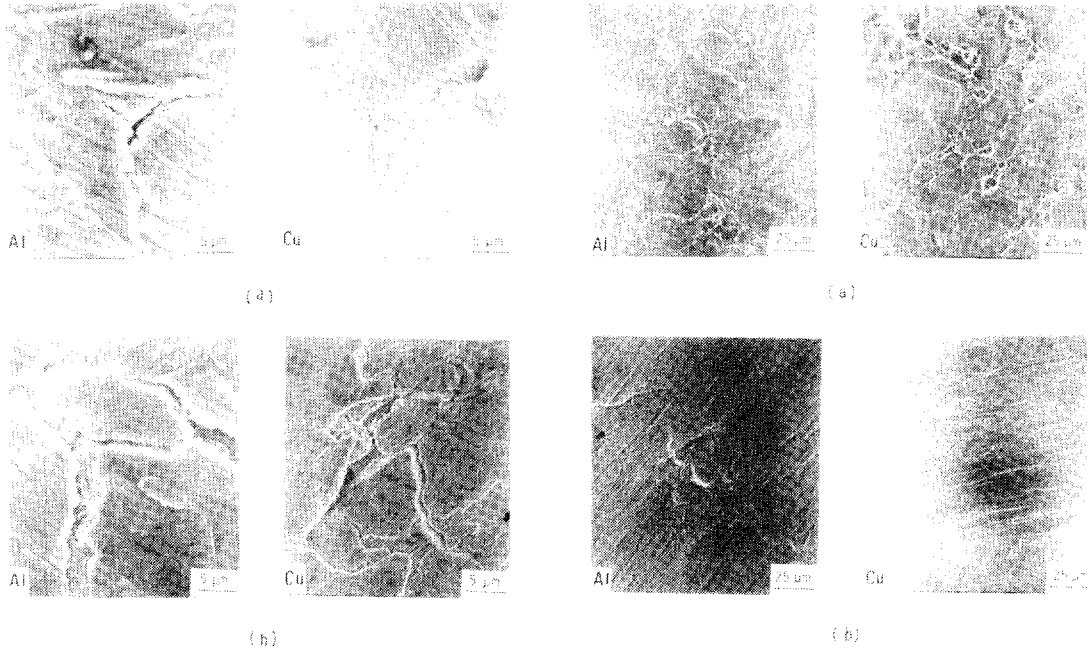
SEM photographs of the weld interface surfaces of Cu-Cu after fracture (a) R=7%, (b) R=28%
